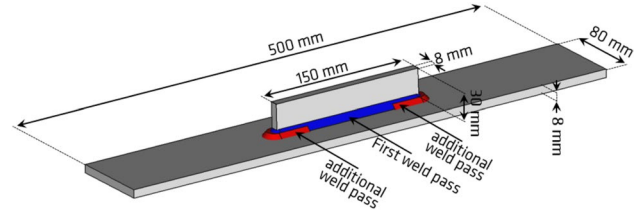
Schematic shape and dimensions of the used longitudinal stiffener with the first and additional weld passes
